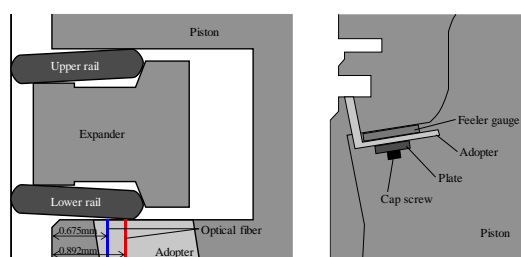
Optical fiber embedded in the lower flank of oil ring groove
